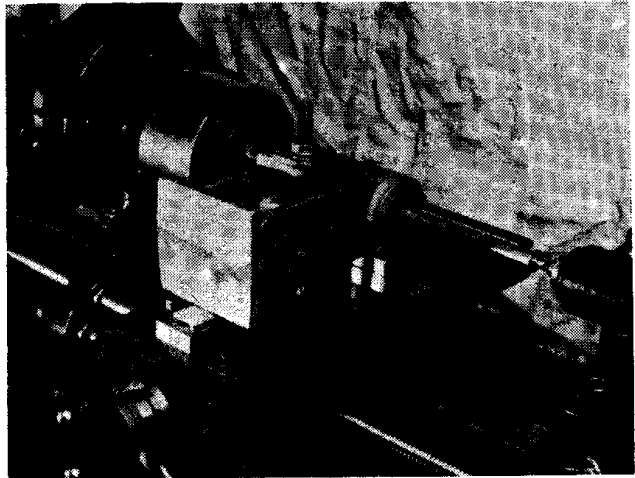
Wheelhead bracket set up on the cross-slide for boring the 1 3/8 in. hole.
